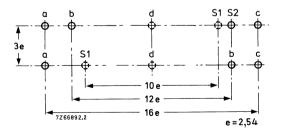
Hole pattern in the printed-wiring board for a tandem potentiometer (viewed on component side).
